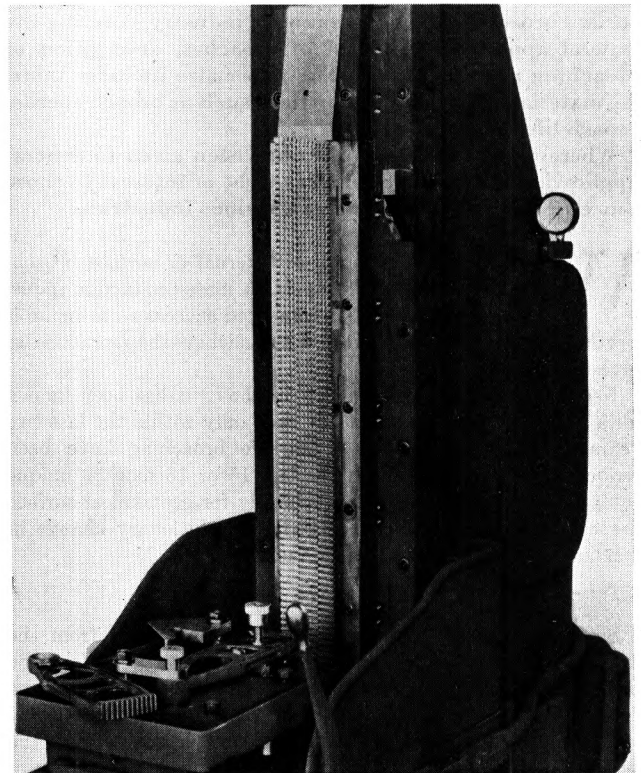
TOOLING FOR BROACHING THE TEETH IN A CAST-IRON SEGMENT
